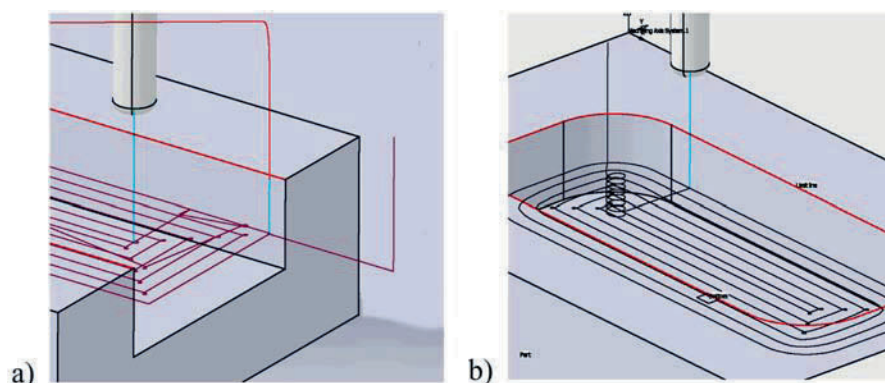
Tool path: (a) machining the surfaces without tangential transitions, (b) machining the tangential surfaces.
